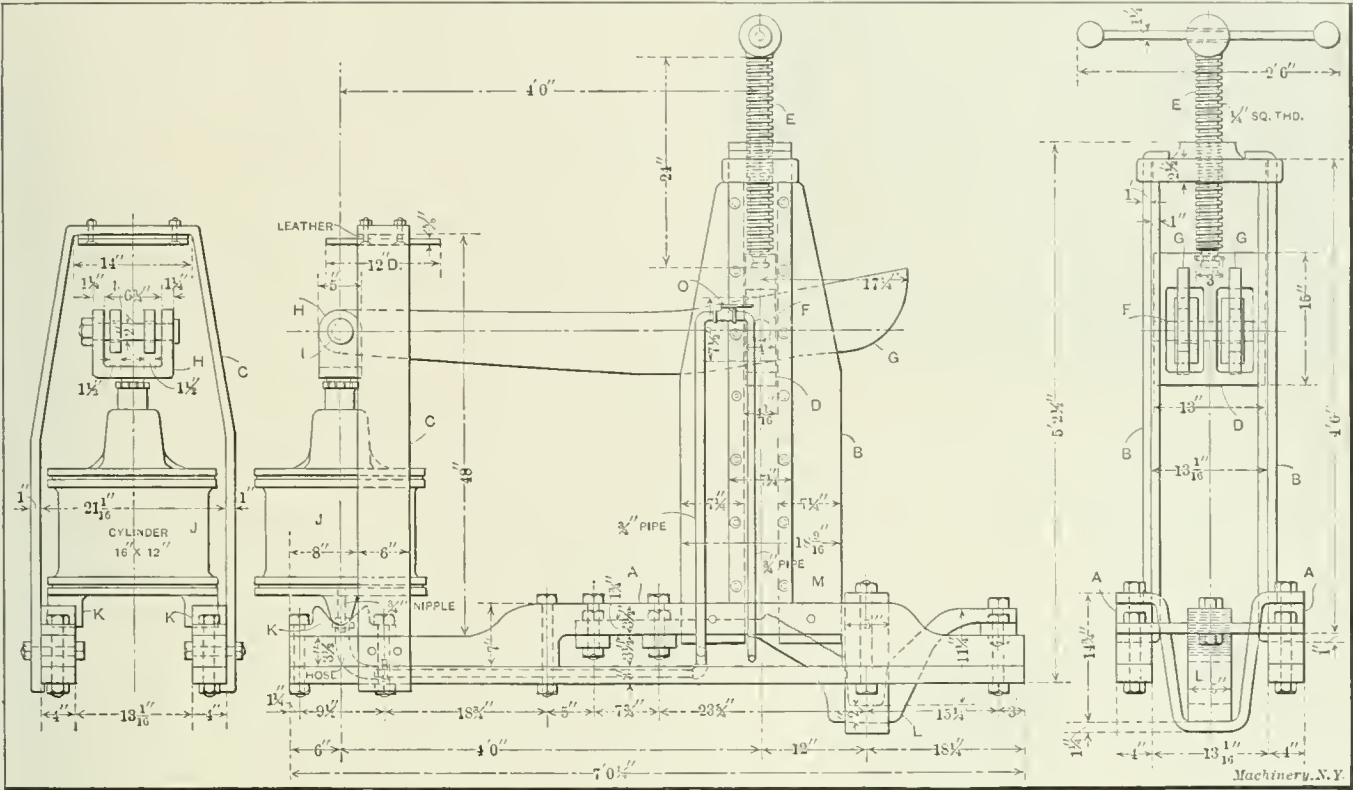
Detail Views of the Pneumatic Press for Removing Spring Bands
